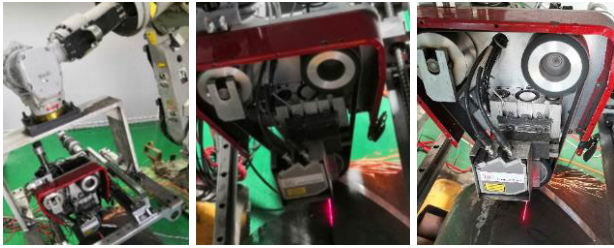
Robotic grinding of helical seam weld beads at steel pipe end.
